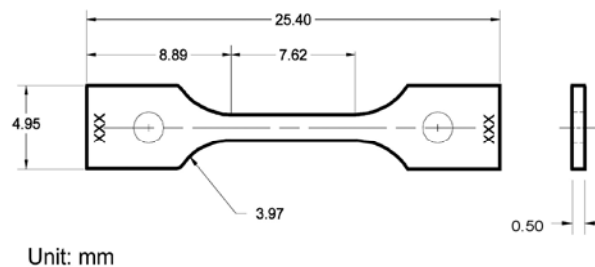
Dimensions of SS-3 type sheet tensile specimens.
